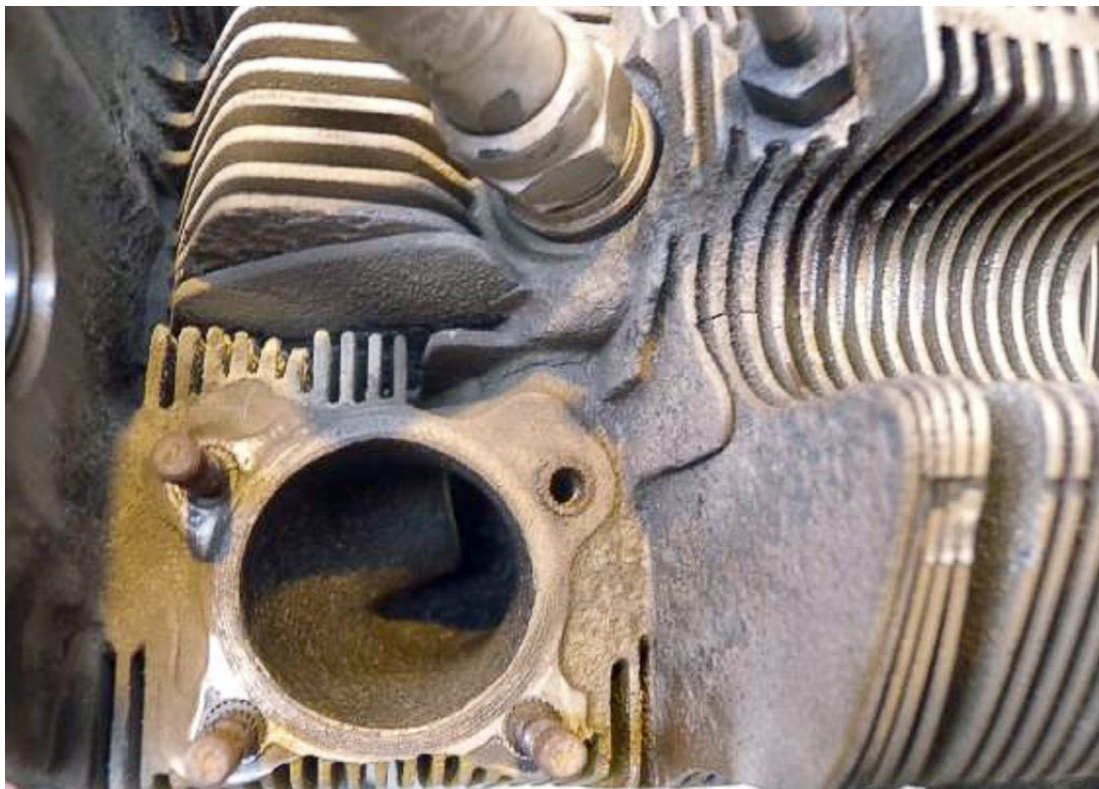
Cracks near the exhaust port and lower spark plug on the no. 3 cylinder
